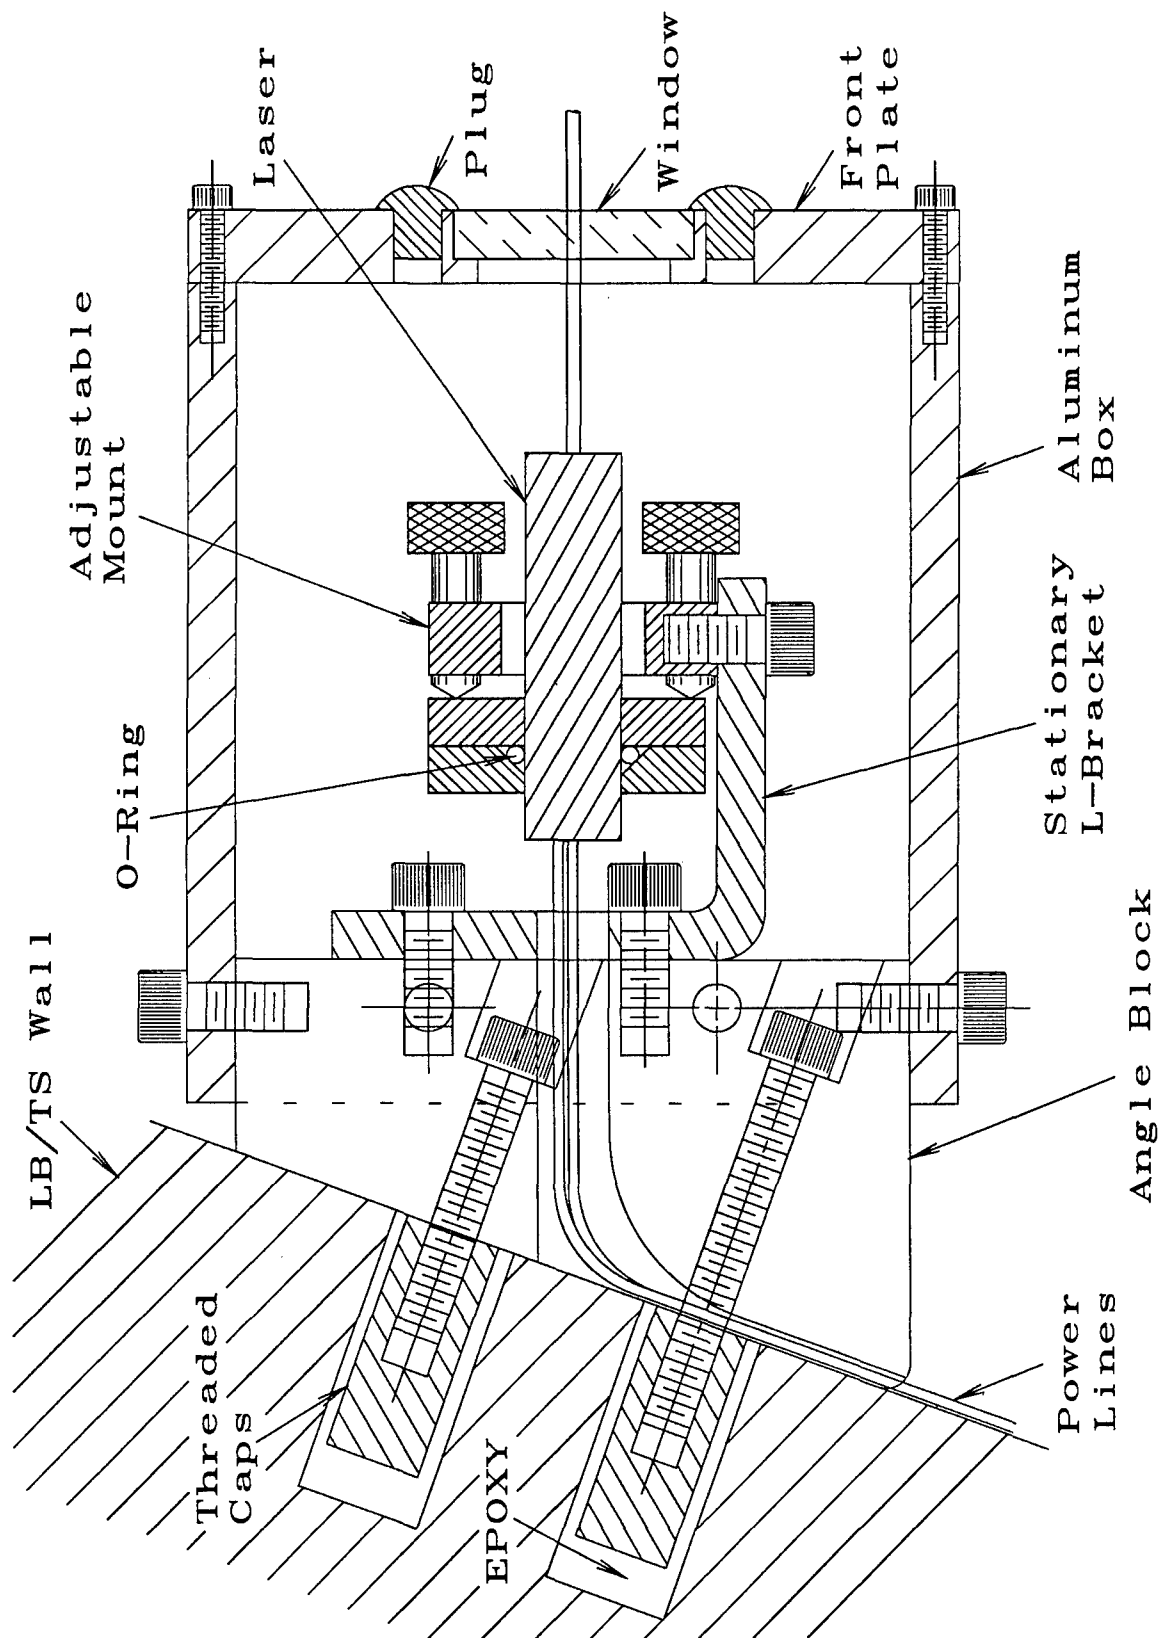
Assembly drawing of laser mounting/adjusting apparatus.
